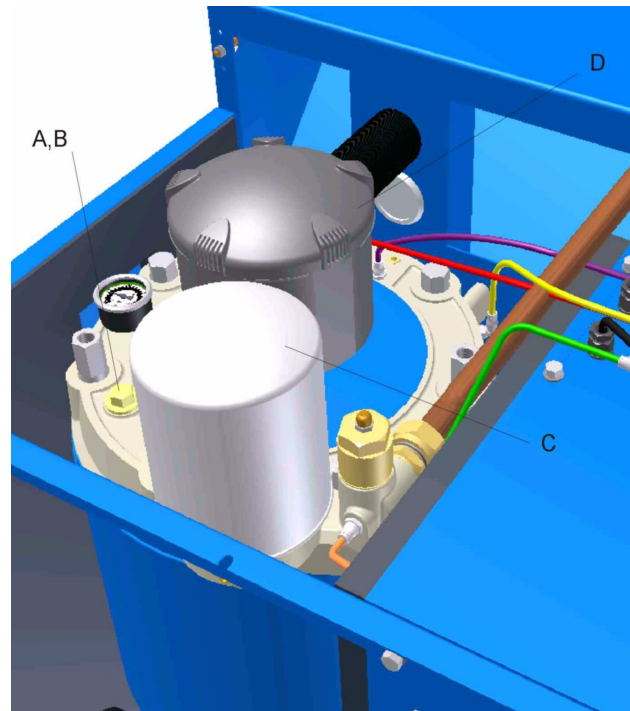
Oil Filler Plug, Air Filter and Separator Element Location
